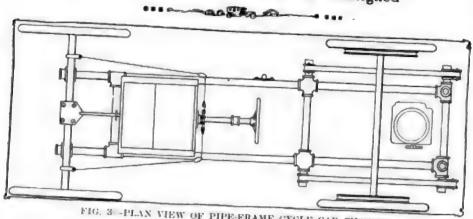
PLAN VIEW OF PIPE-FRAME CYCLE CAR CHASSIS
